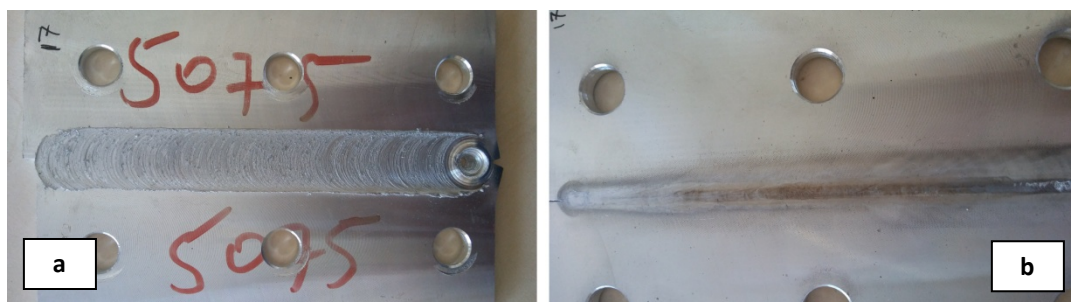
(a) Top view and (b) bottom view of a similar weld of alloy AA7075-T651
